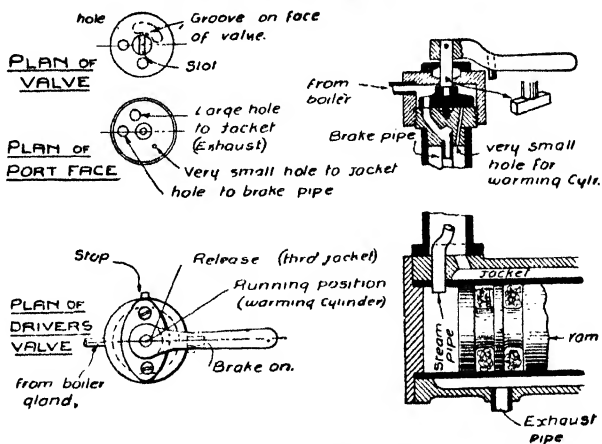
Driver's Valve and Piston for Steam Brake.
